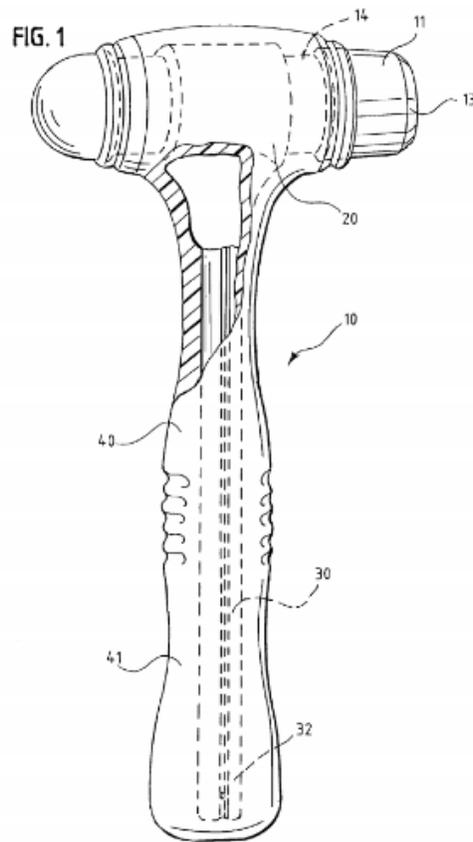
This complete dead blow hammer is shown with the outer casing that is used to provide grip and comfort for the person using it. The hammer has a tubular head with a cylindrical collar. (Figure is taken from the patent attached).
